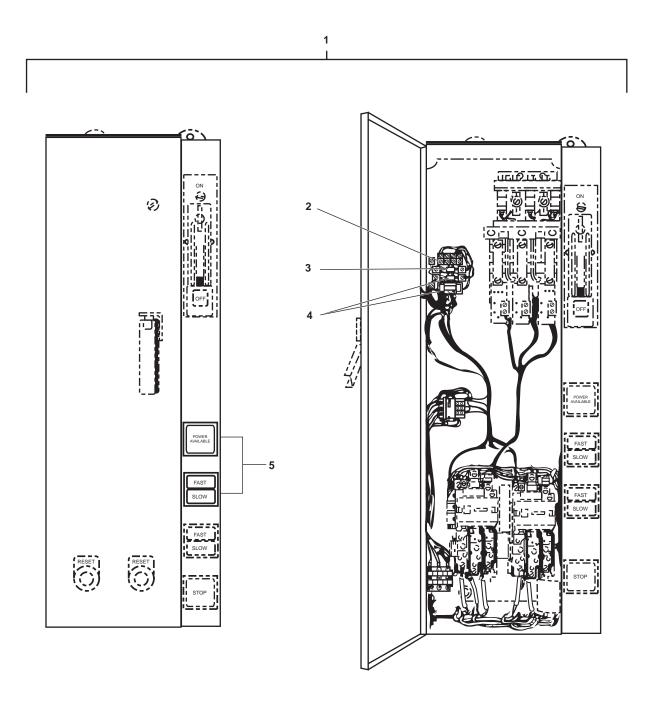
Engine Room Supply Fan 1 & 2 Motor Controller
